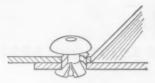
Expanded prongs force sheets or parts together, hold them tightly in compression. No metal is removed, no grinding or finishing is required.
